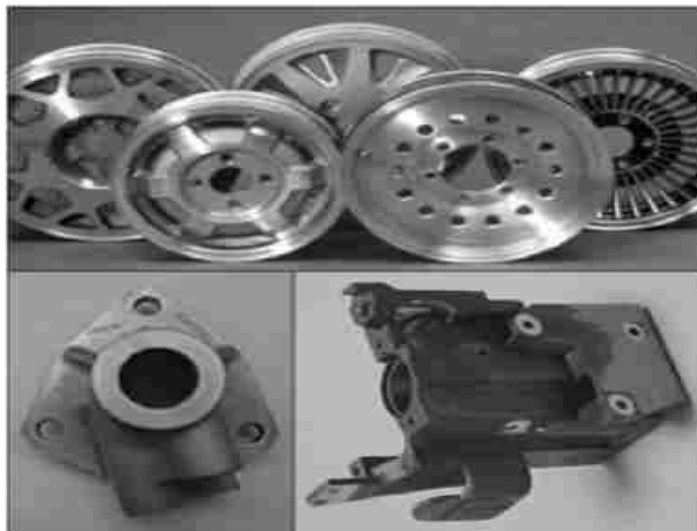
Squeeze cast automotive components produced by SPX Contech Corporation (upper - wheels, lower left - valve housing, lower right - steering column housing) [64].
